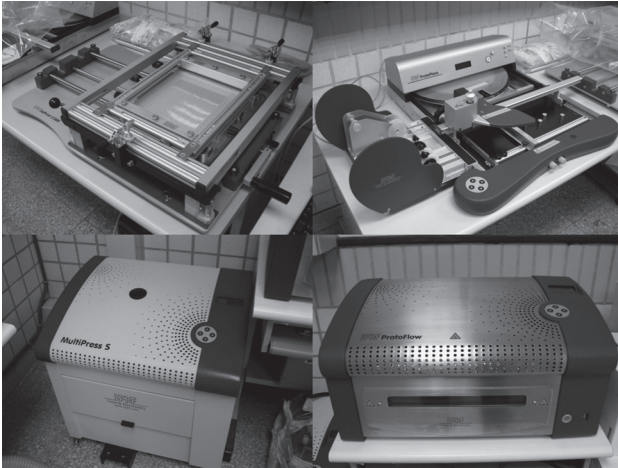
SMT solder past printer (top left), pick and place assembly system (top right), multilayer prototyping presser (bottom left), and lead-free reflow oven (bottom right).
